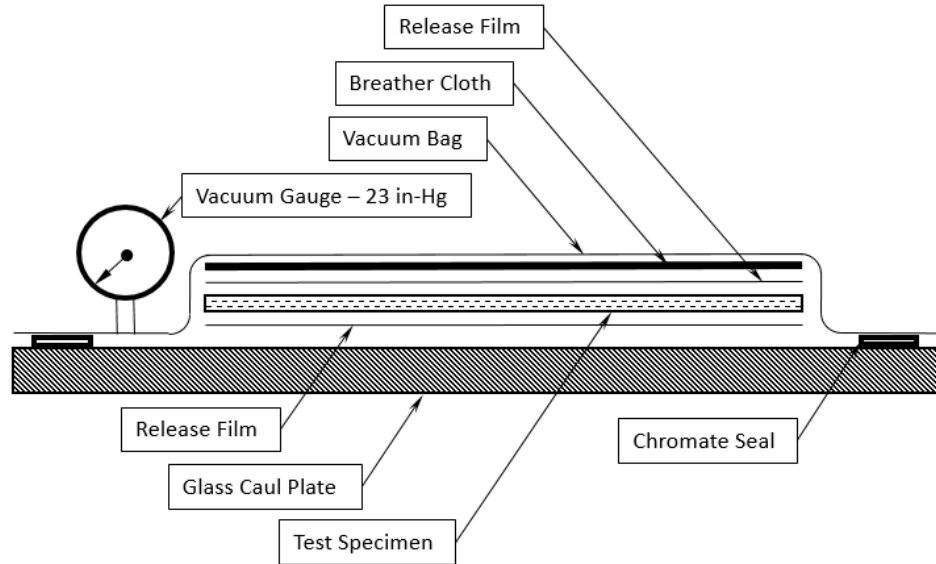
Impedance tube test specimen fabrication vacuum bag configuration diagram
